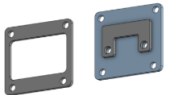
Solidworks assembly of platform for load cell to allow for deflection
